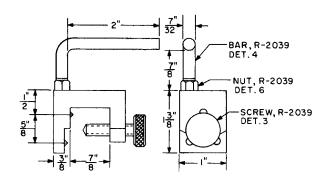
R-2039 Indicator Clamping Fixture Tool
